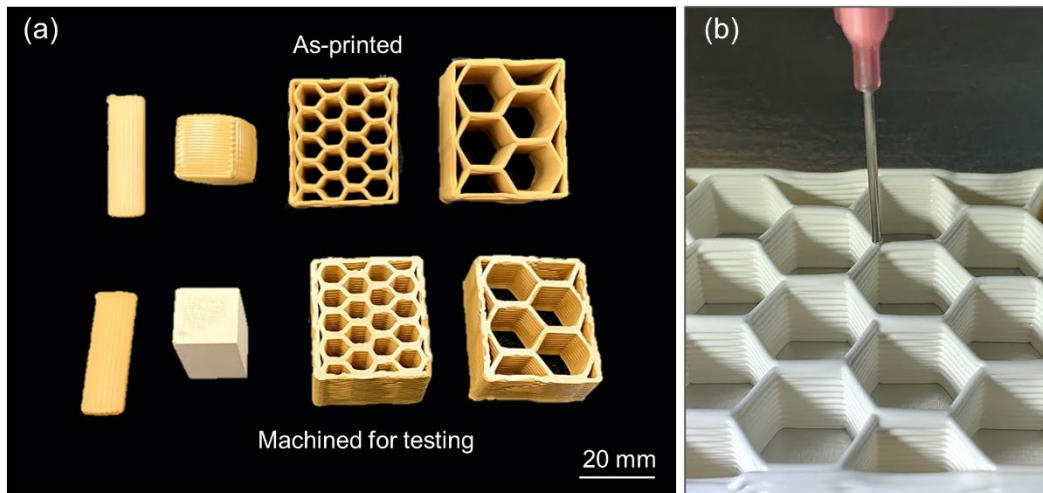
Printed S32HS foam samples for mechanical testing. a) Rectangular flexural samples, compression blocks, and honeycombs both as-printed and machined for testing. b) DIW printing of honeycombs demonstrating ability to fabricate complex foam geometries.
